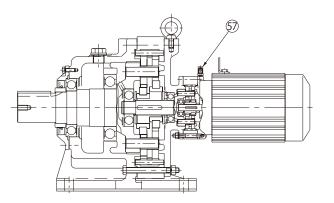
Type CHHM (Horizontal, Gearmotor), 2 Stage Reduction (Example: Frame size 6225DB)
